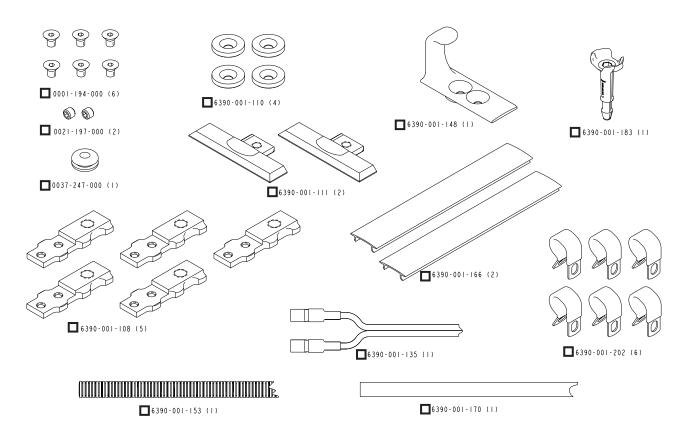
Floor Plate Installation Kit Components (6390-001-055)
